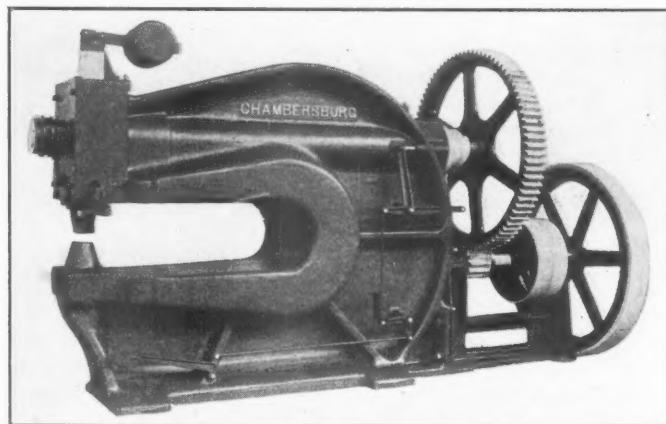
Single End Punching Machine with Mechanical Control and Belt Drive
